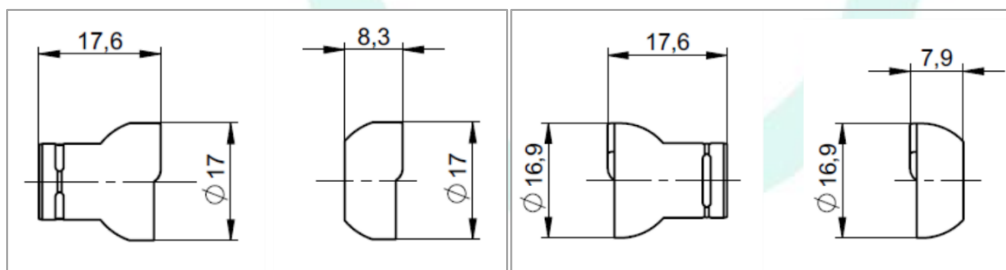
Part 1 and Part 2 of PE Bearing FC (left) and PE Bearing SC (right) - Dimensions
